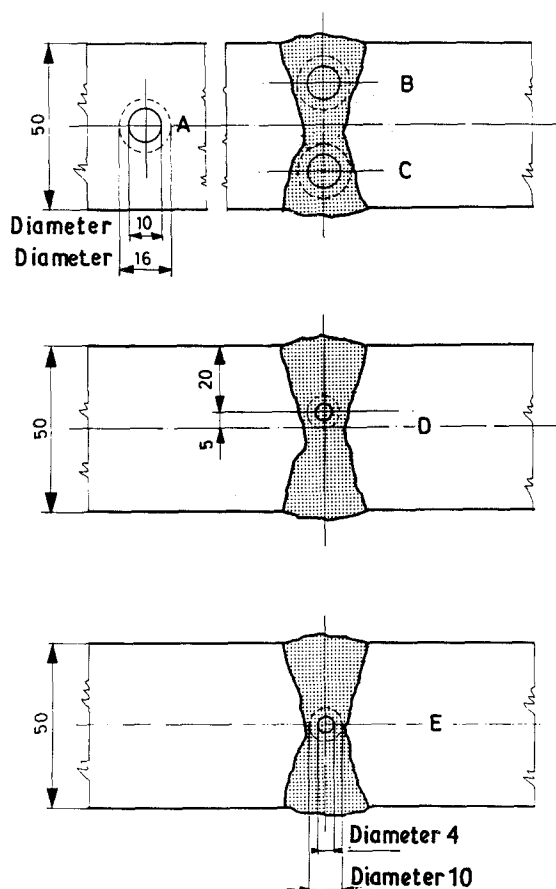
Location of standard (A, B, C) and small (D, E) tensile specimens. Hour-glass-shaped region represents type 316 stainless steel SA weld-deposited metal. Dimensions in mm.
